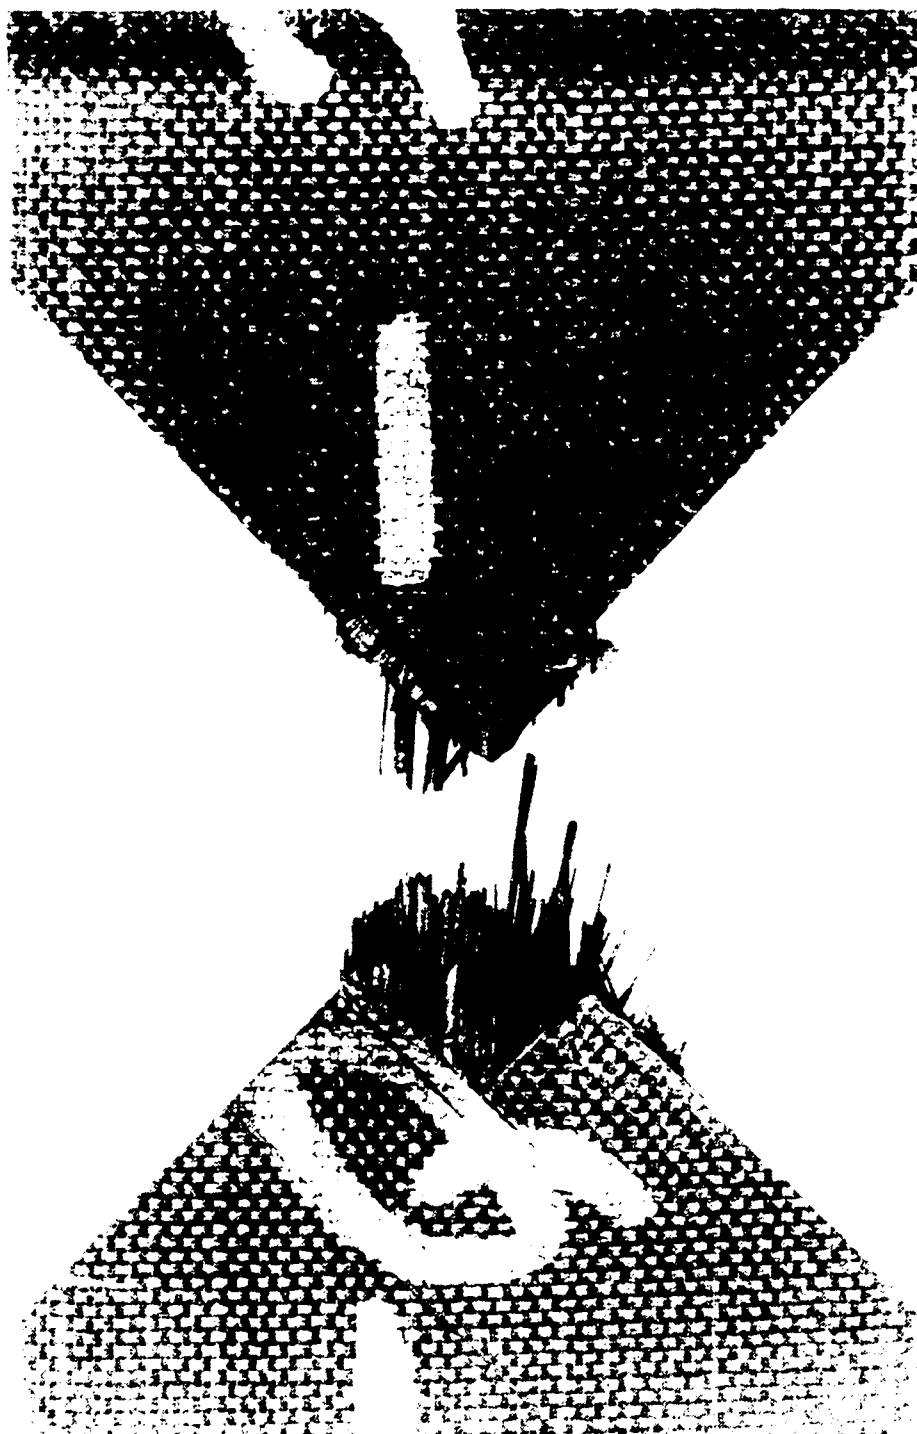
Typical failure of a 90/0 AFPB specimen.
